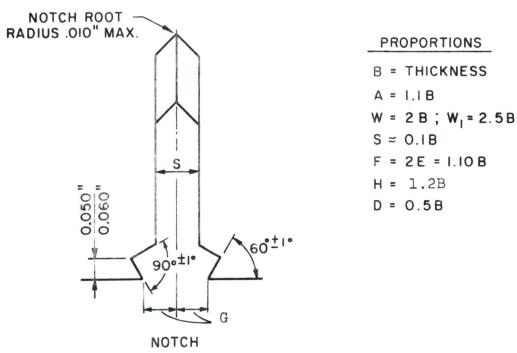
COMPACT TENSION FRACTURE TOUGHNESS SPECIMEN
